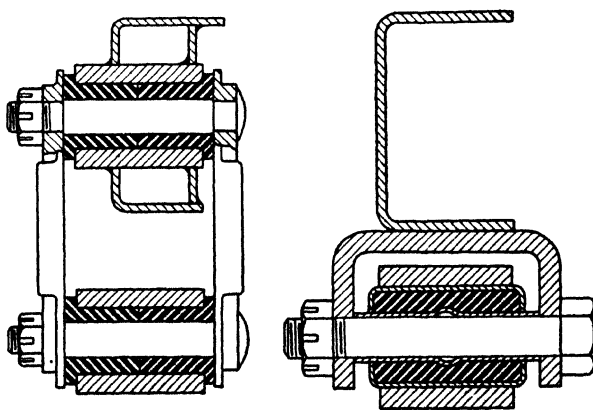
(left).—RUBBER BUSHINGS ON SHACKLE PINS.
